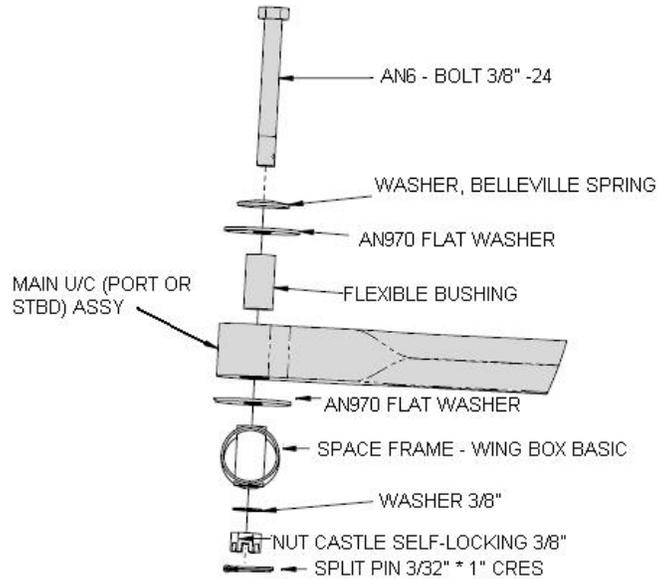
Exploded View of Main Landing Gear Attachment Bolt
